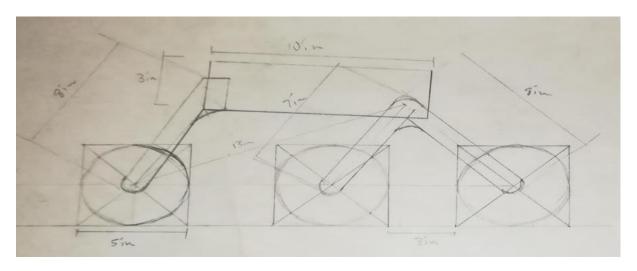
Sketch 3: Preliminary Technical Sketch (side view)
